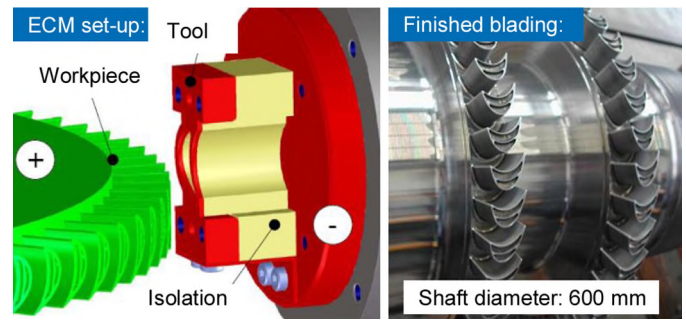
EC machining of blades on steel (X22CrMoV211) rotor shafts for stationary gas and steam turbine applications [60,62].
